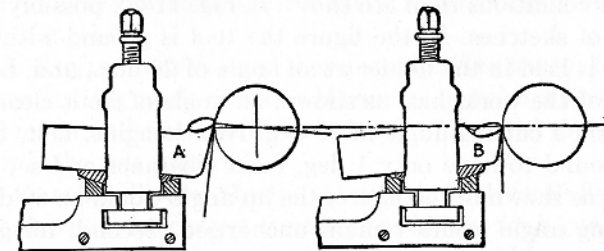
Setting a lathe tool to get the proper clearance angle. A front clearance of 10 or 12 deg. is usually ground on a forged tool. Note the position above the center of the new tool A so as not to give excessive front clearance. Note B, which represents the position of the same tool after being sharpened several times, set on center to give correct clearance.
